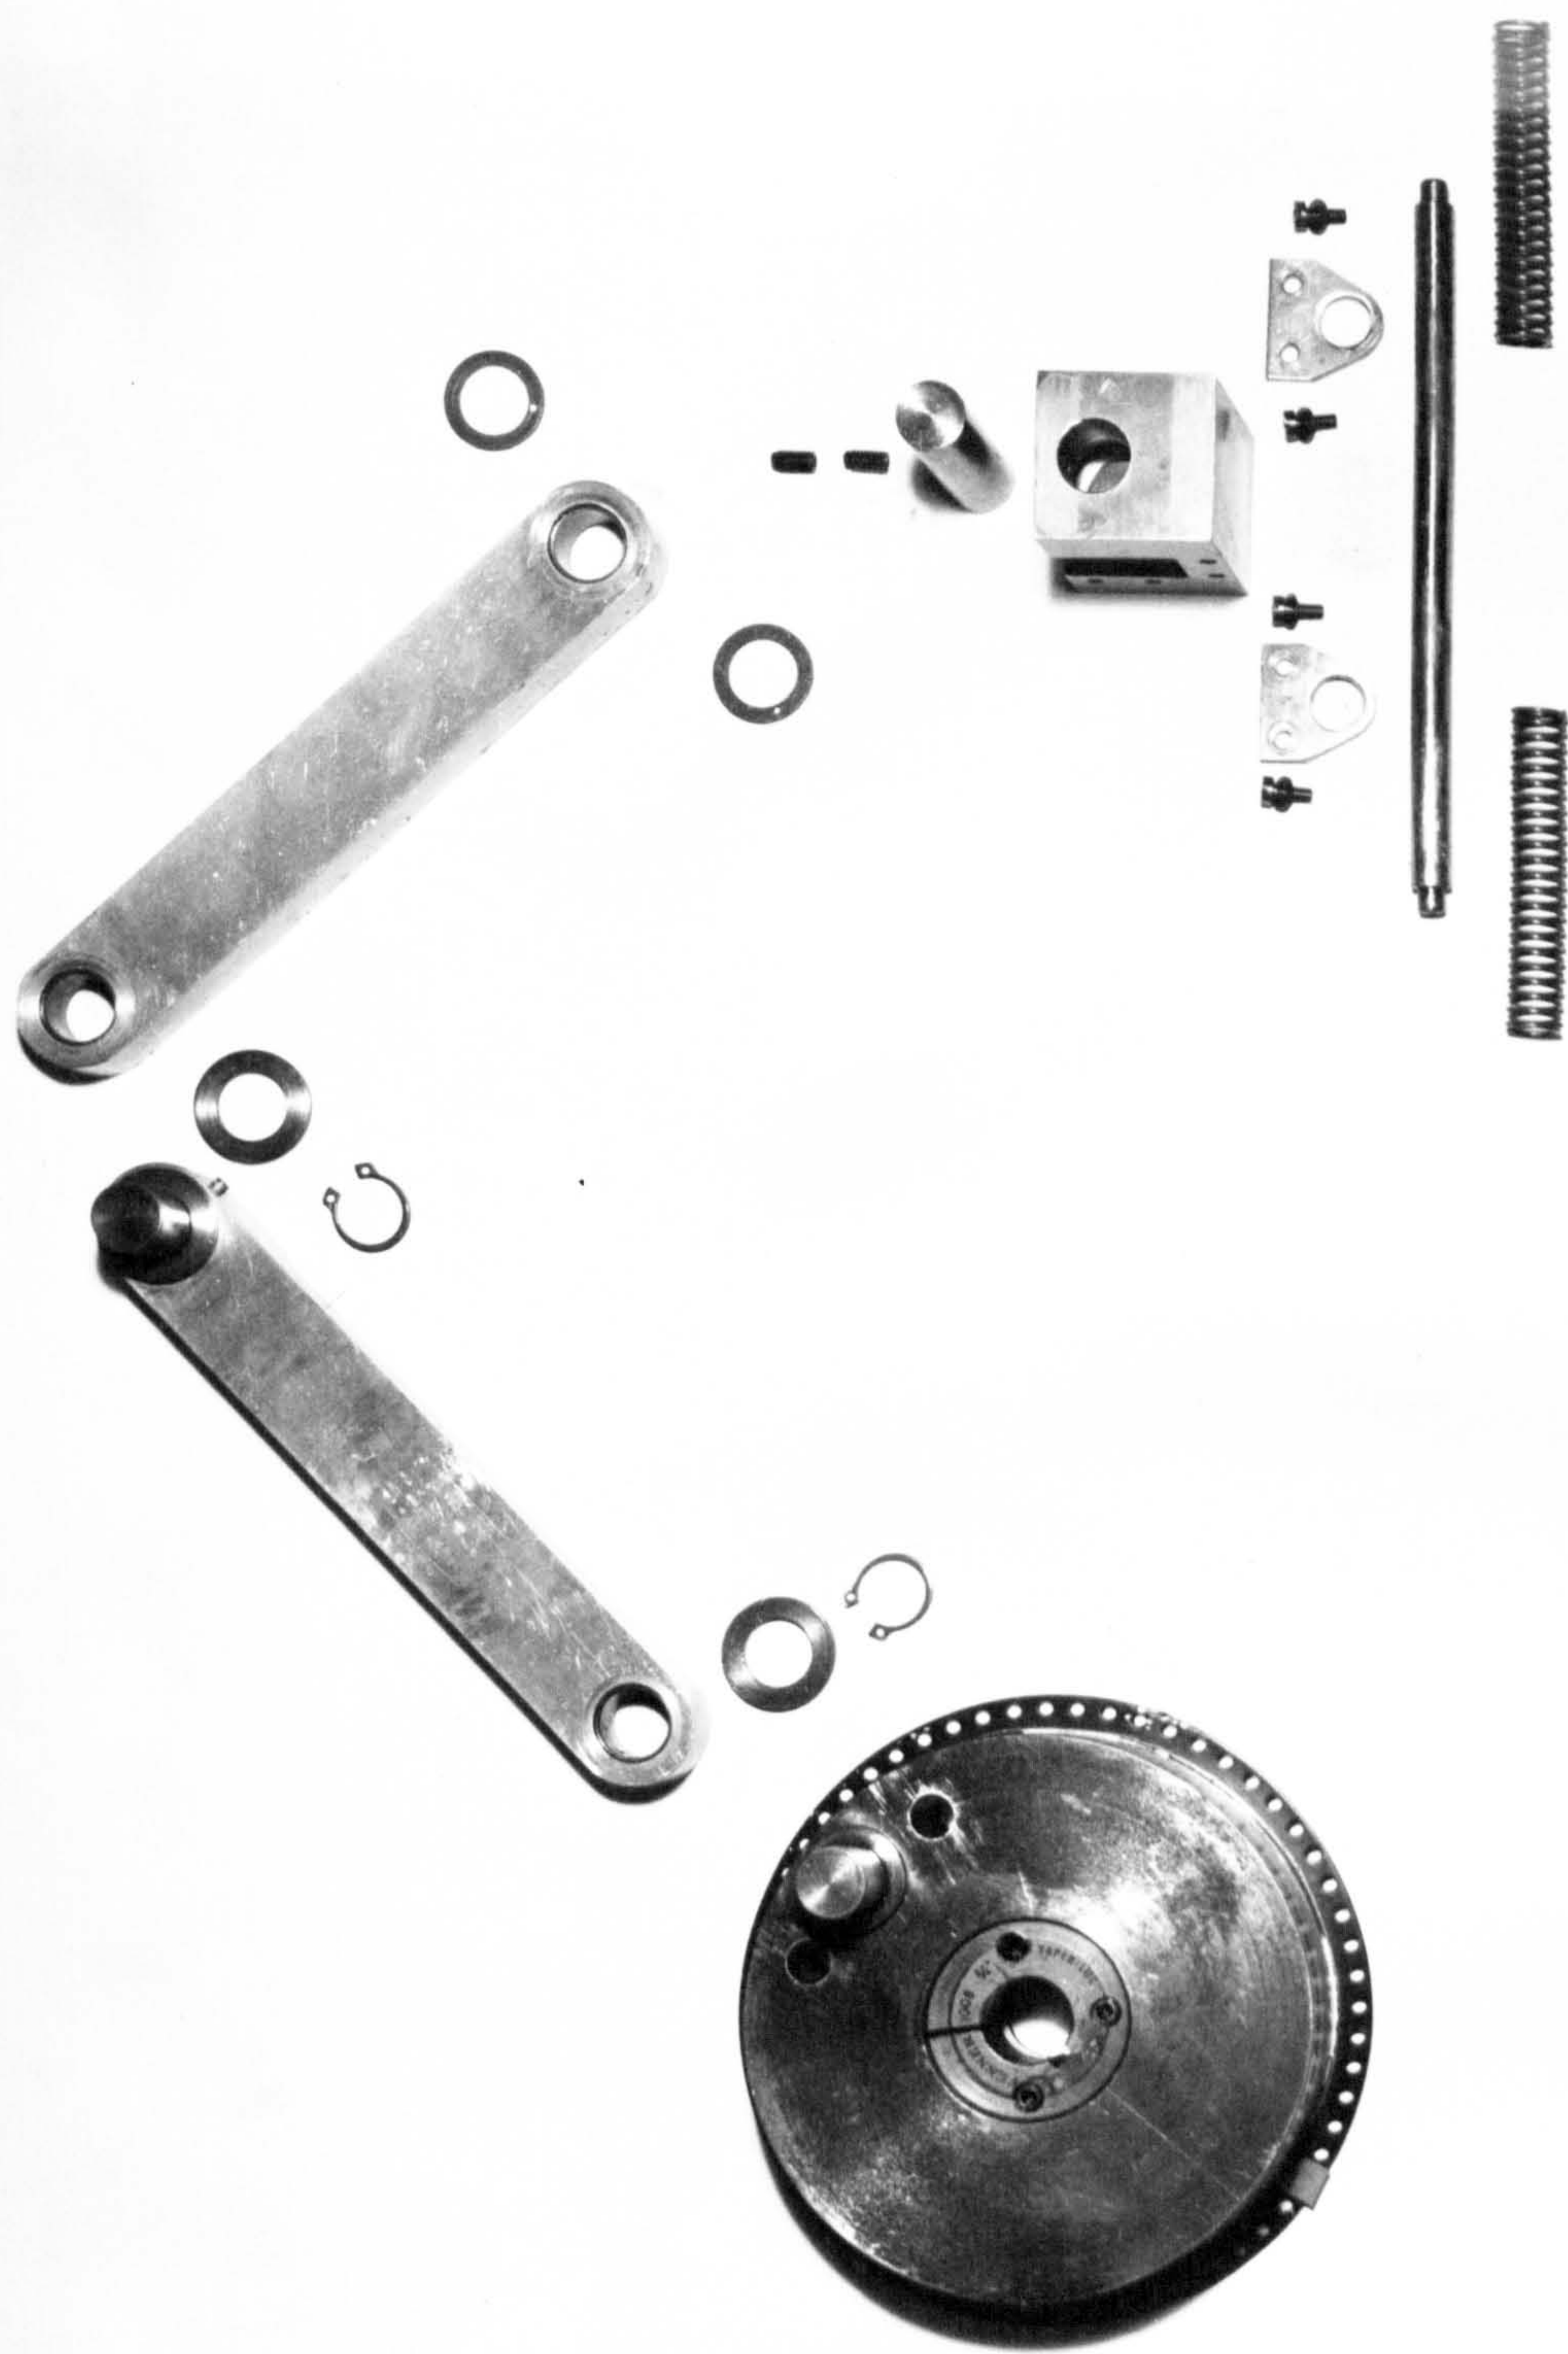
AN EXPLODED VIEW OF THE LINKAGE OF EXPERIMENTAL RIG 1.
